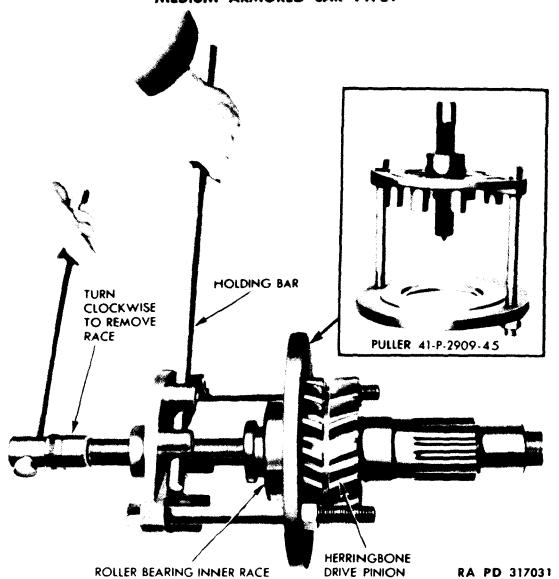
Removing Herringbone Drive Pinion Radial Bearing Race
